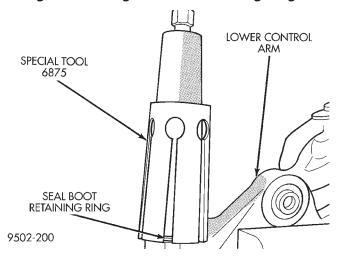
Retaining Ring Installed In Ball Joint Seal Boot
